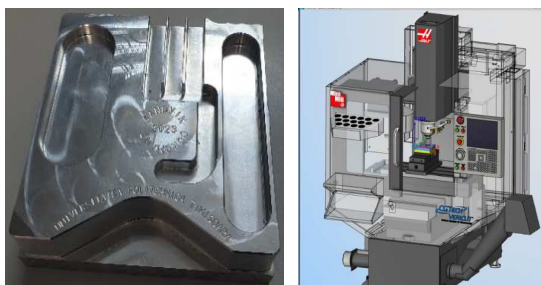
The final part manufactured and the Minimill CNC milling center.
